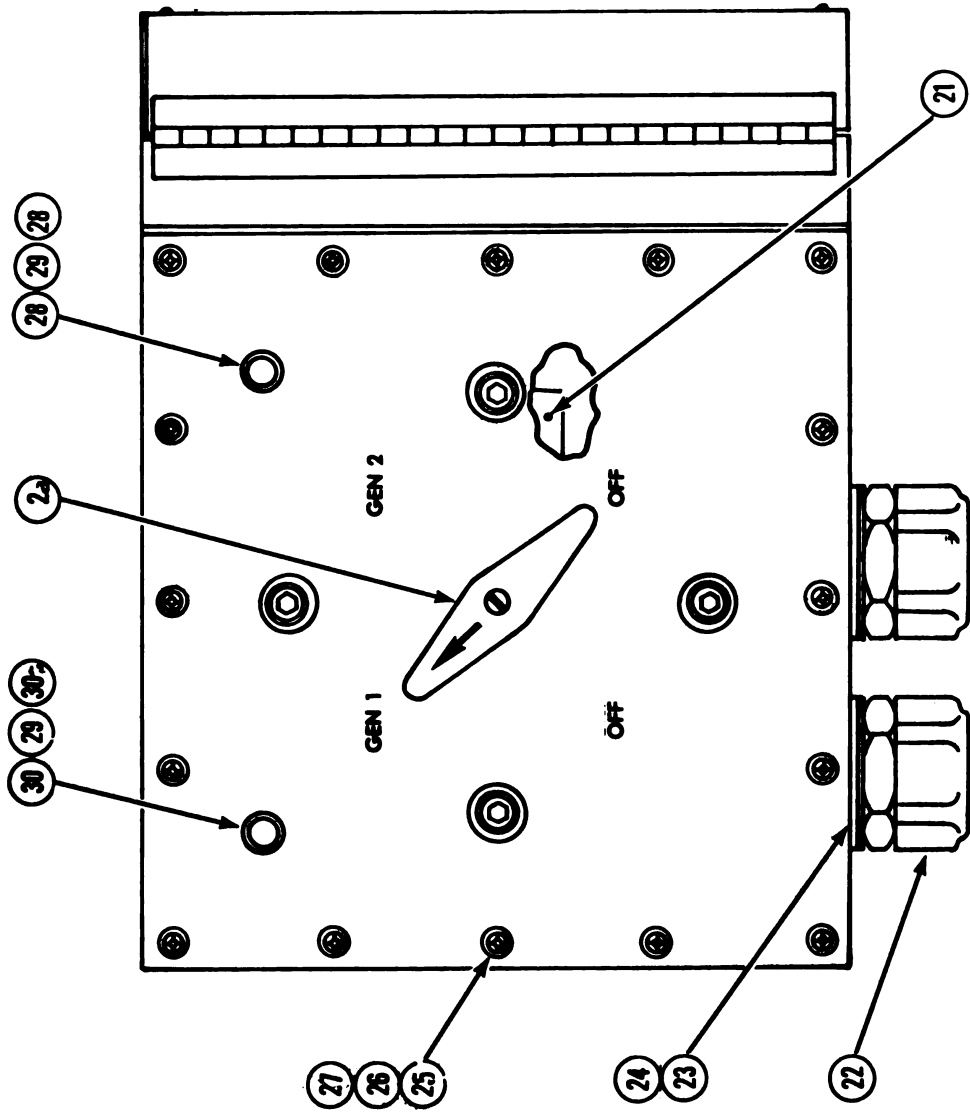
Switchbox Assembly (Sheet 2 of 3)
